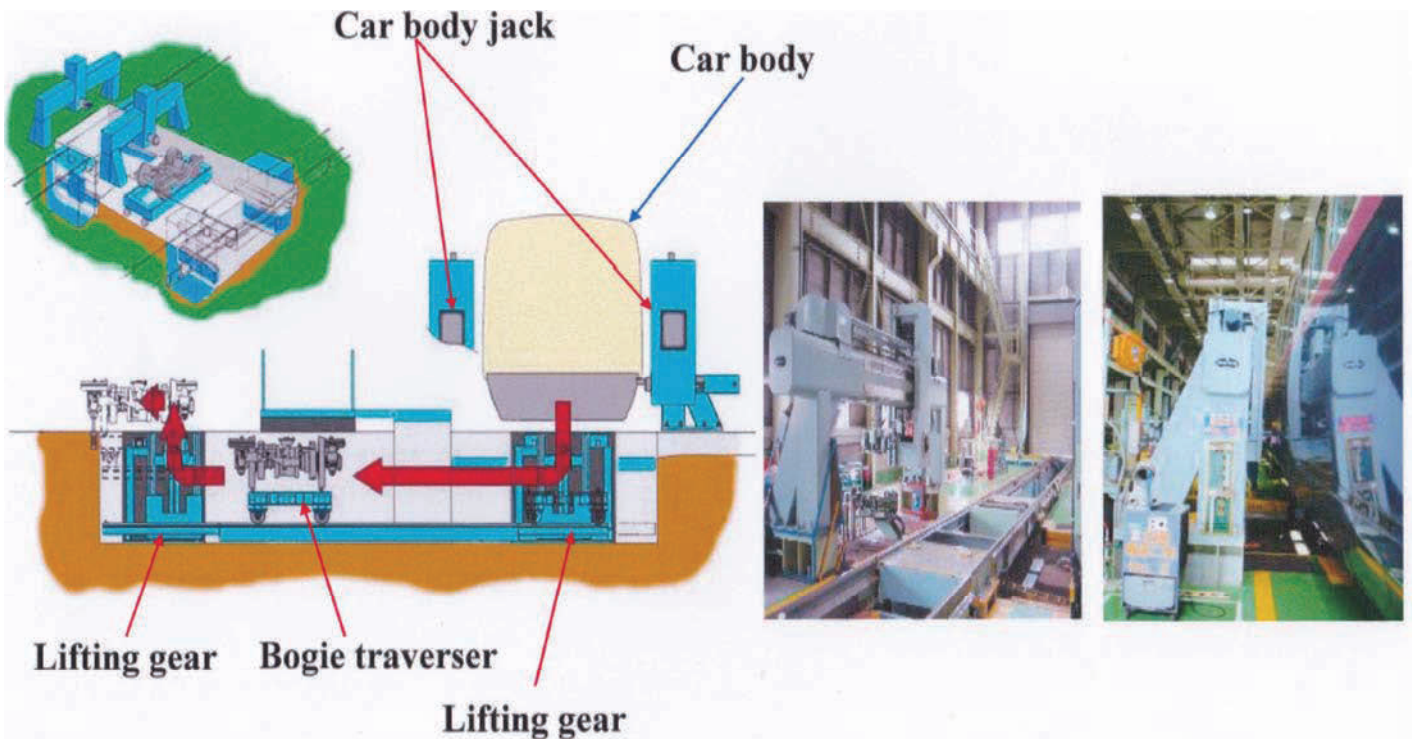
Bogie Changing Machine (for Bogie Inspection)
